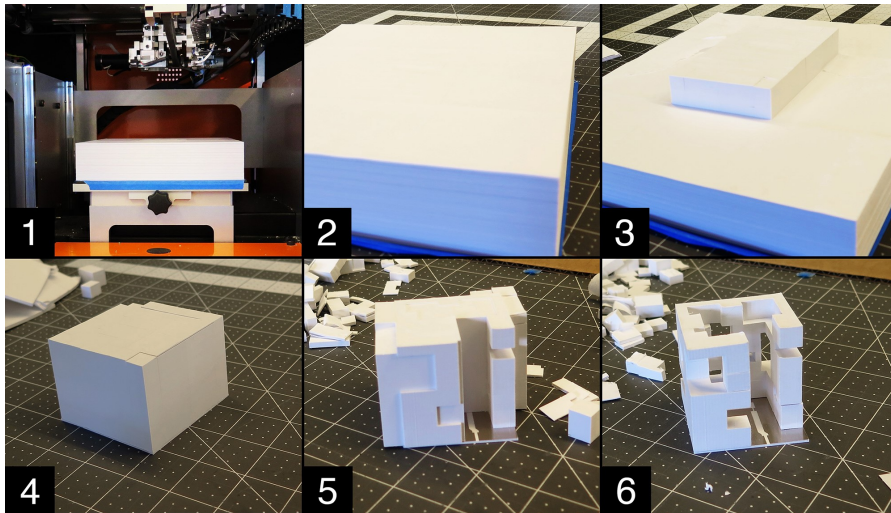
Extracting the rest of the printed object by using a tweezers and fixing damaged parts with craft supplies.
